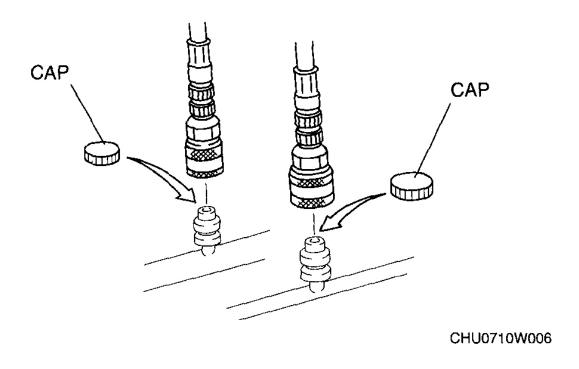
Installing Caps To Charging Valves Courtesy of MAZDA MOTORS CORP.
